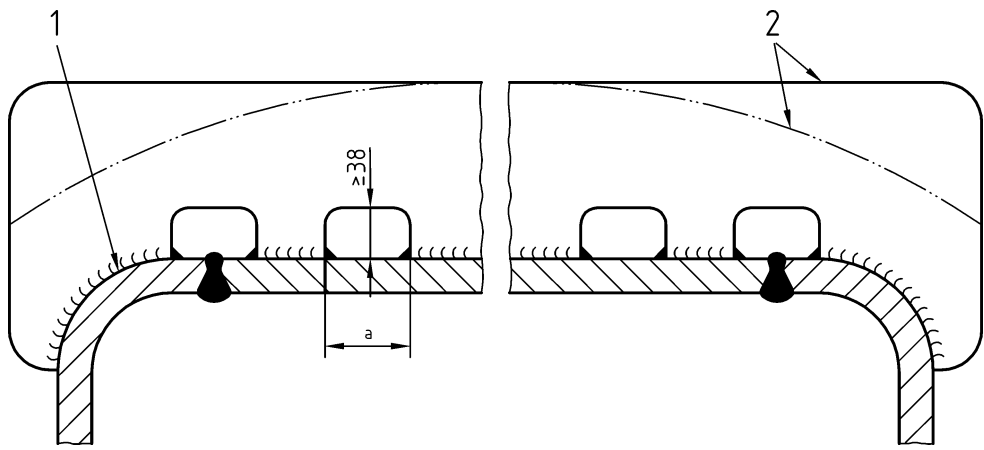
Permitted weld details of reversal chamber bar stays
